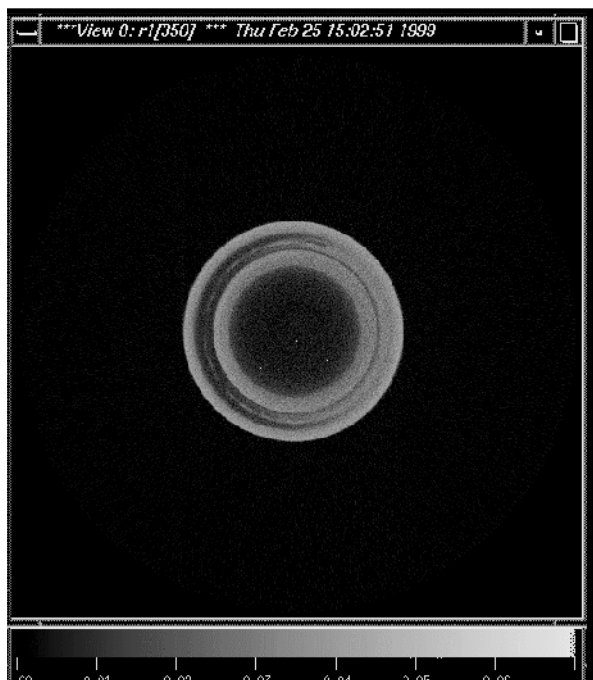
CT slice at laser weld joint of Ford prototype clutch retainer housing (by permission of Ford Motor Company, Dearborn, Michigan).
